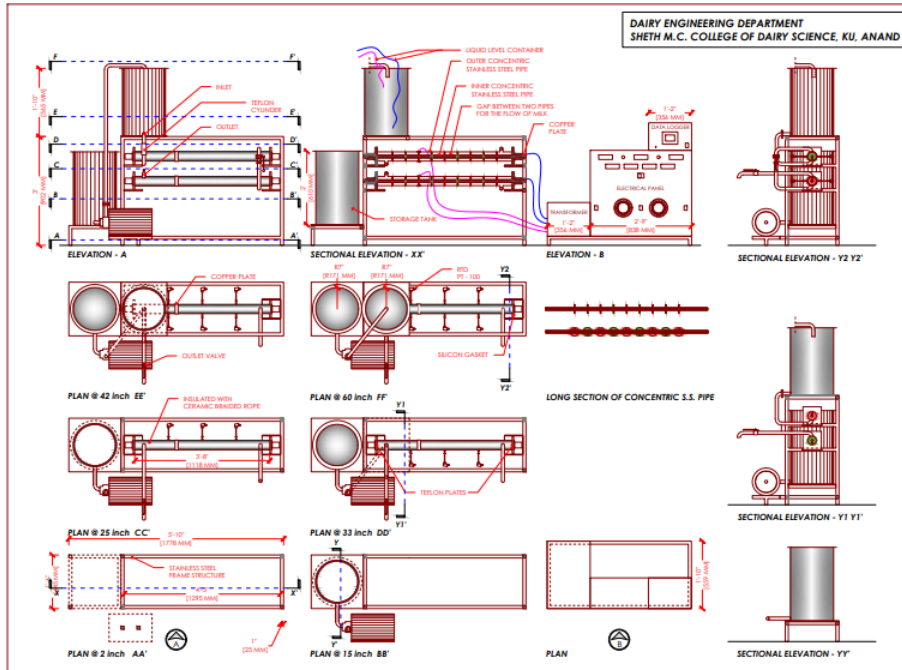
Auto CAD drawing for developed continuous ohmic heater
